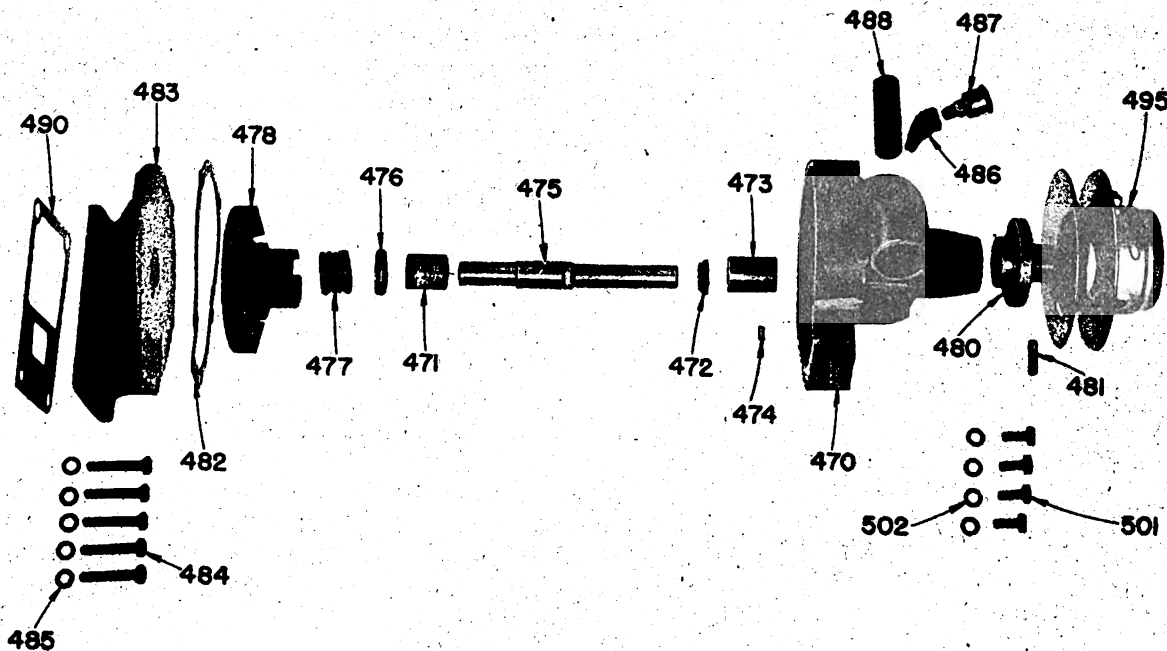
Component Parts of 1A13-360-1 Water Pump
